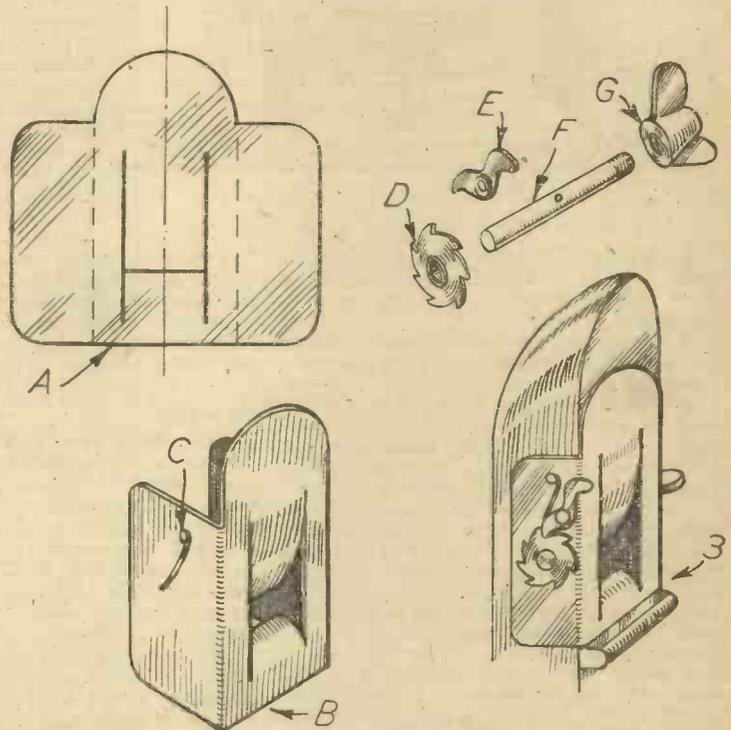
Details of string-holder plate, showing ratchet and pawl arrangement.
